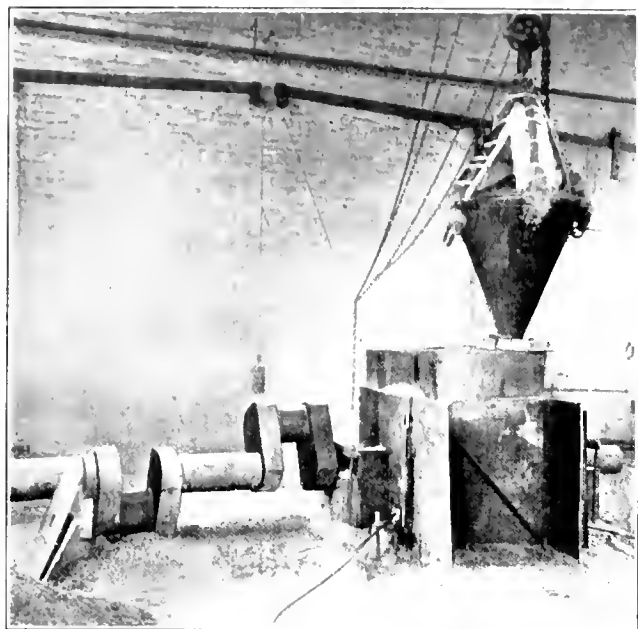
Large Crankshaft ready to be welded by the Thermit Process
